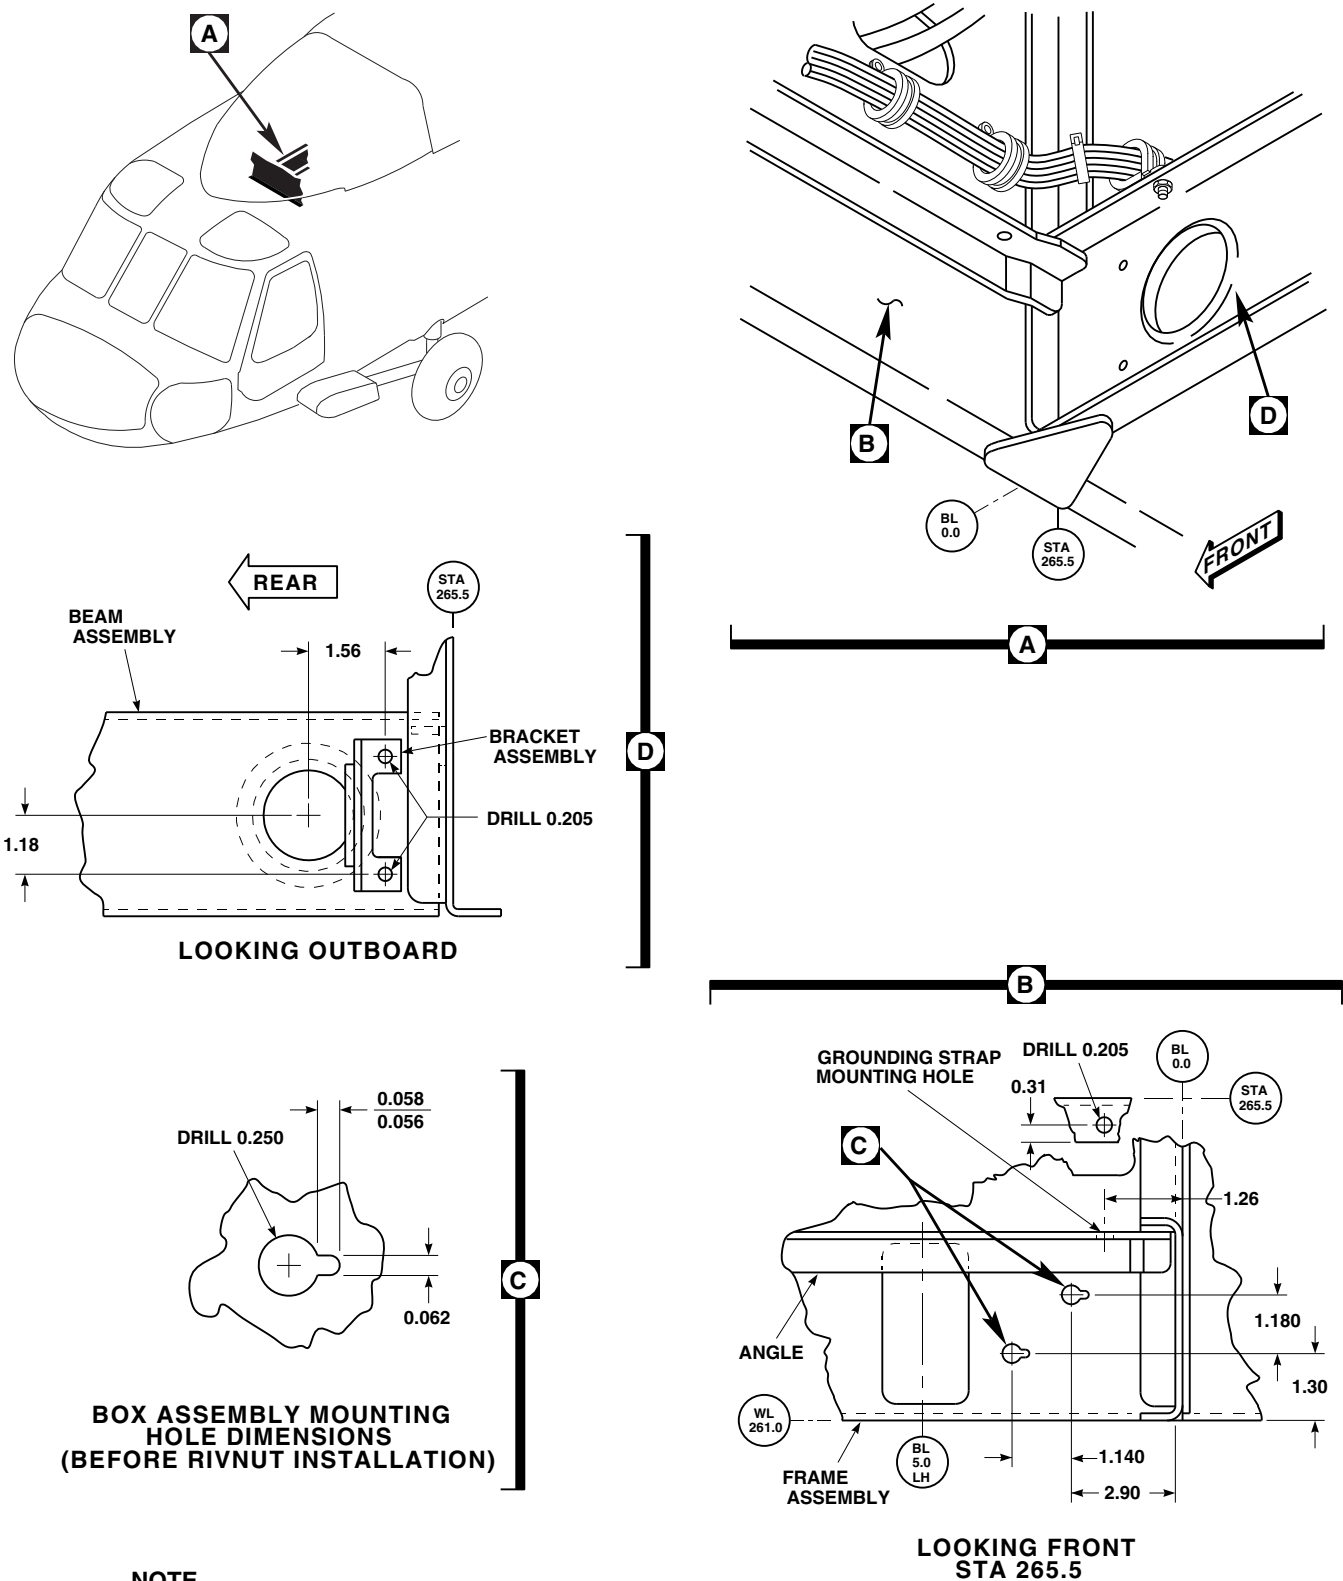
INSTALLATION HARNESS MOUNTING
